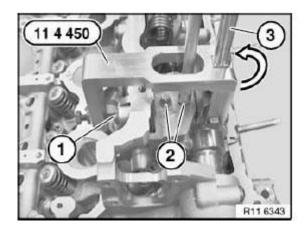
Turning Eccentric Lever Courtesy of BMW OF NORTH AMERICA, INC.
